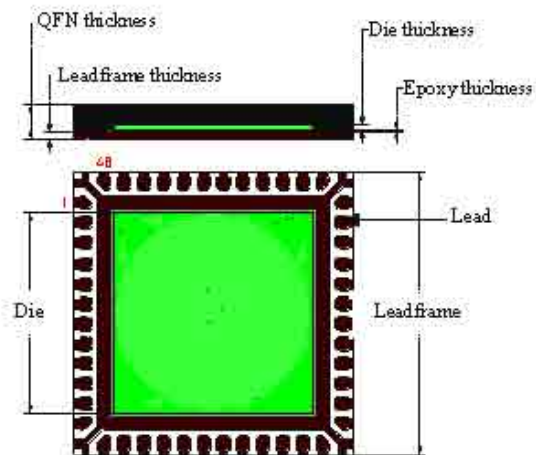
Schematic diagram of a QFN package showing the side view and the top view
